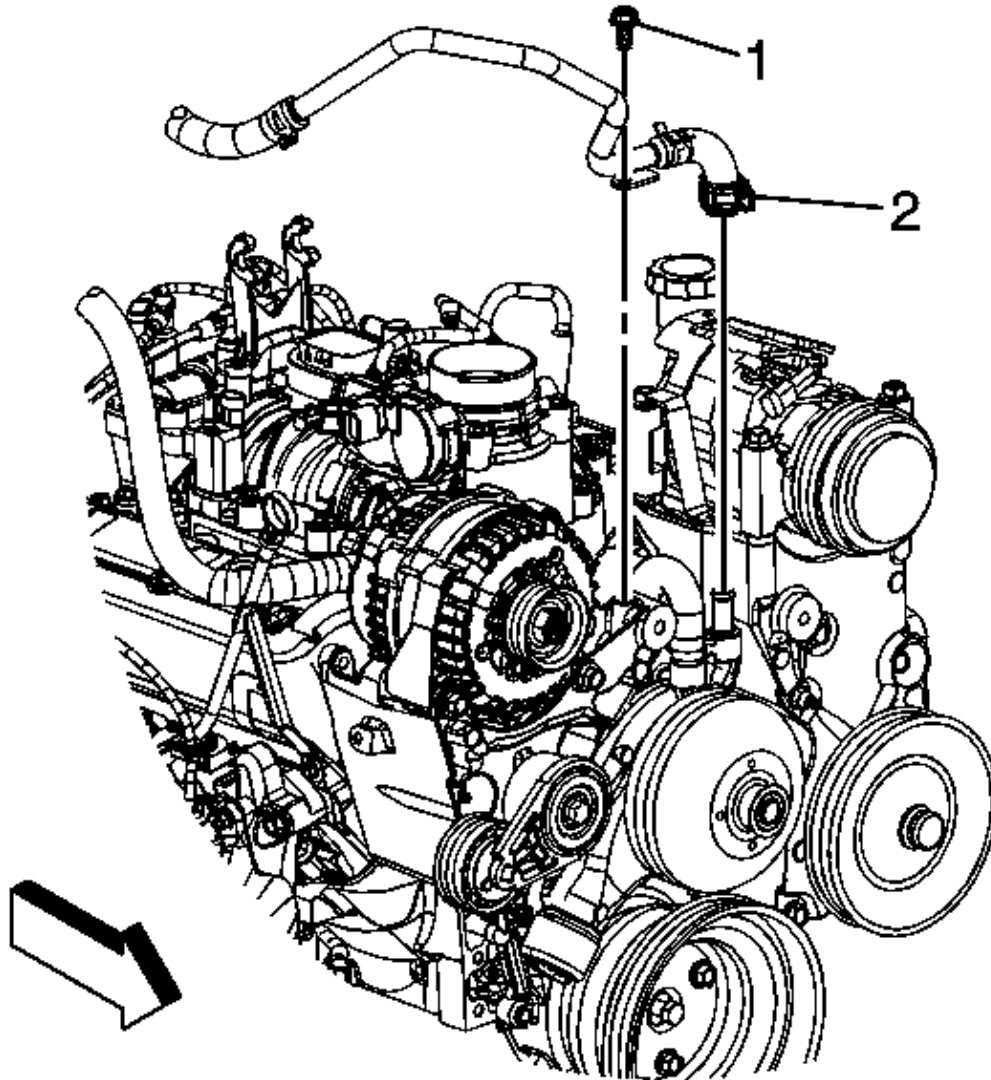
View Of Heater Outlet Hose & Clamp Bolt
